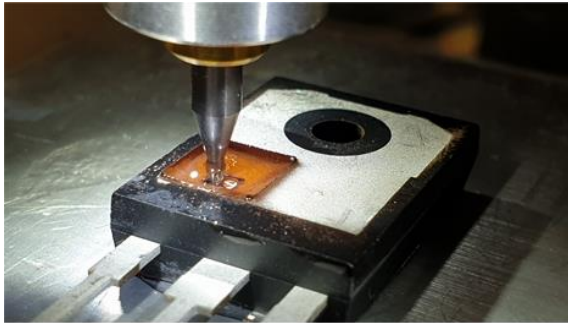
Illustration of the milling step for a similar power SiC device (trial on similarly packaged device).
